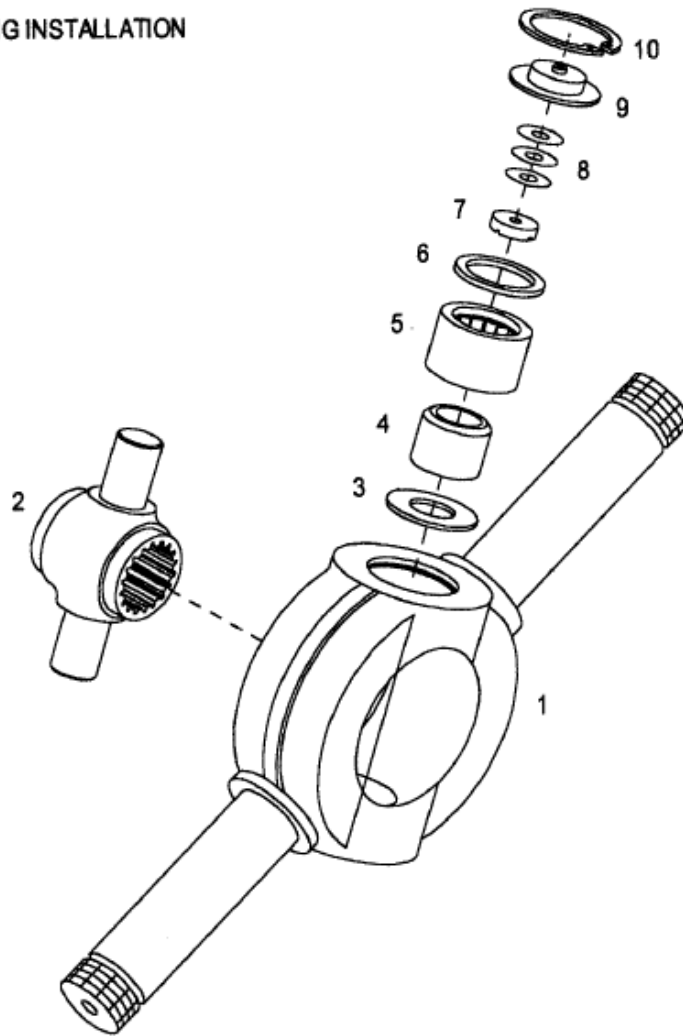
TAIL ROTOR NEEDLE BEARING UPDATE KIT INSTALLATION
